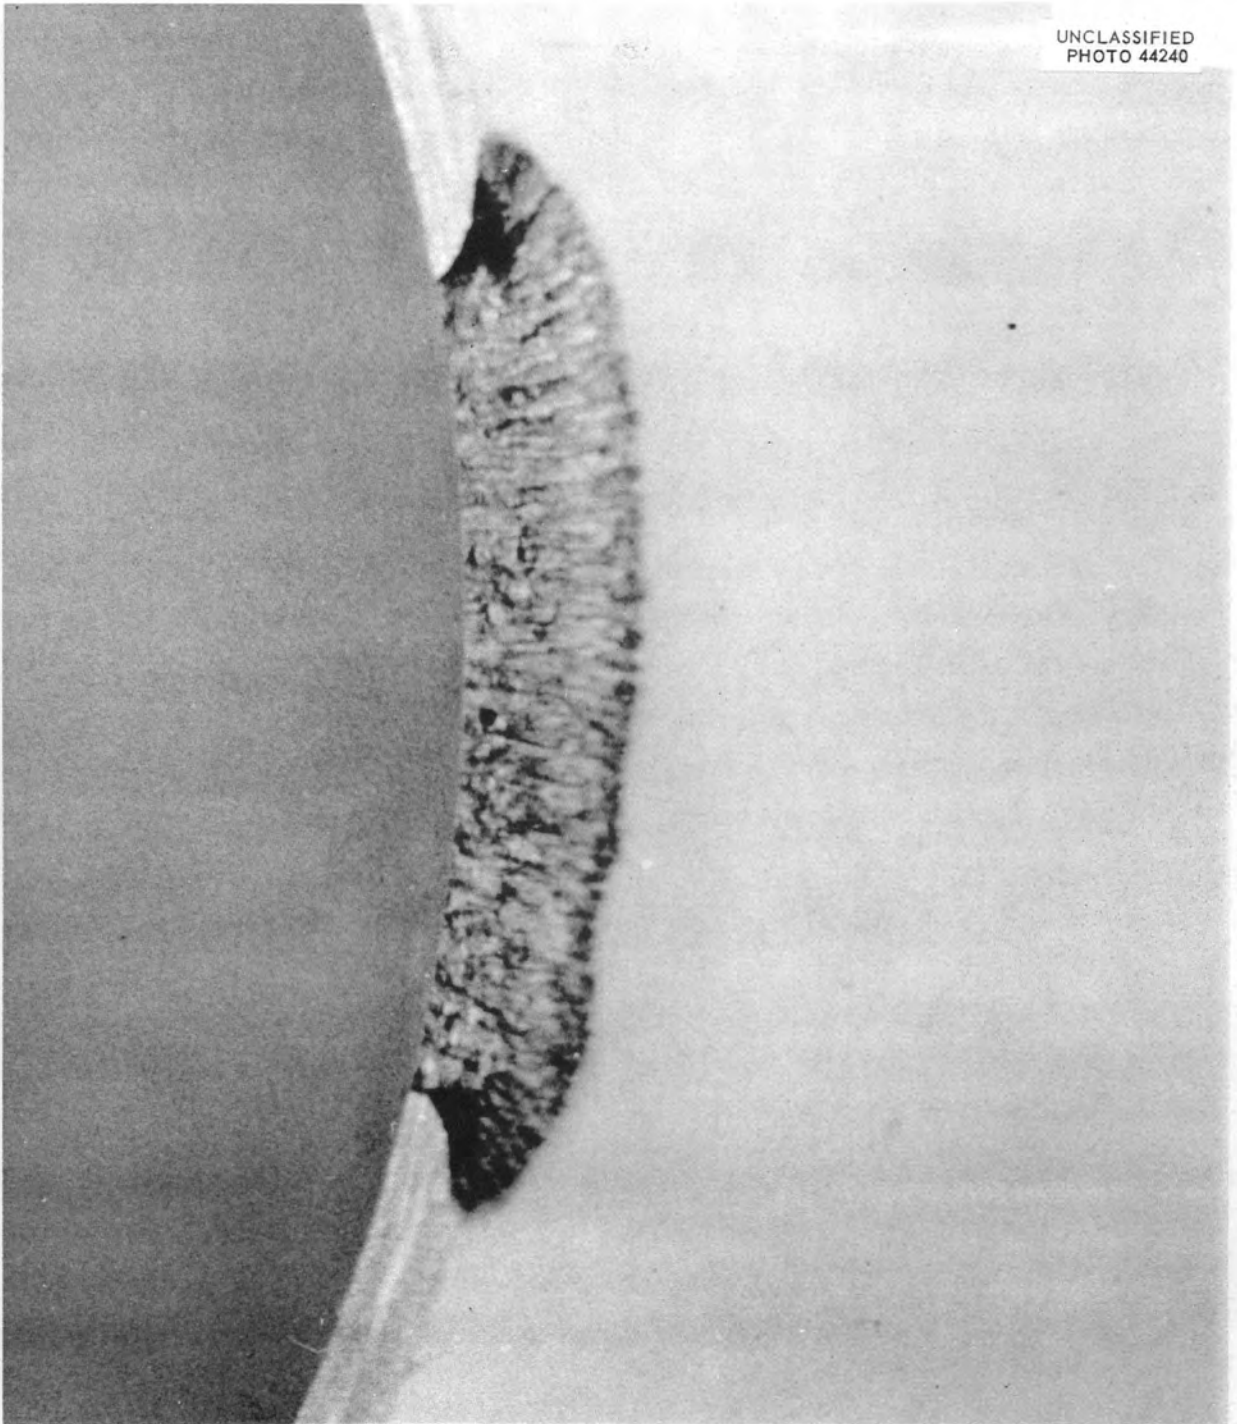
Enlargement of Failure in Carboloy Valve Seat.
